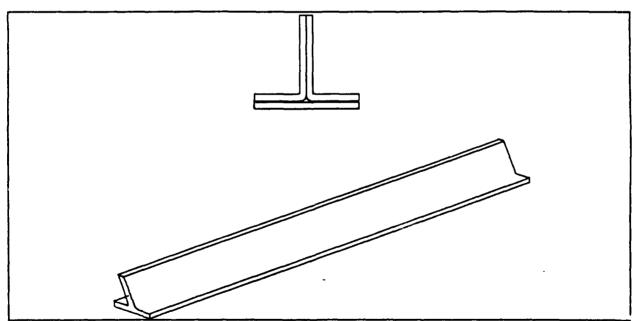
"T" - Composite Assembly (TCA) Composite Layup/Assembly - "T" Section
